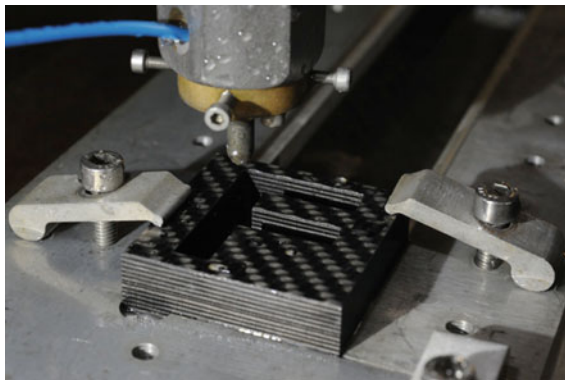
Fixturing equipment for small parts at WJ_Lab of Politecnico di Milano. A main frame and a sliding bar sustain the part over the pool and locate it according to the machine reference system. The part is fixed to the frame by means of a suitable clamp positioning, which does not occupy the machining trajectory
